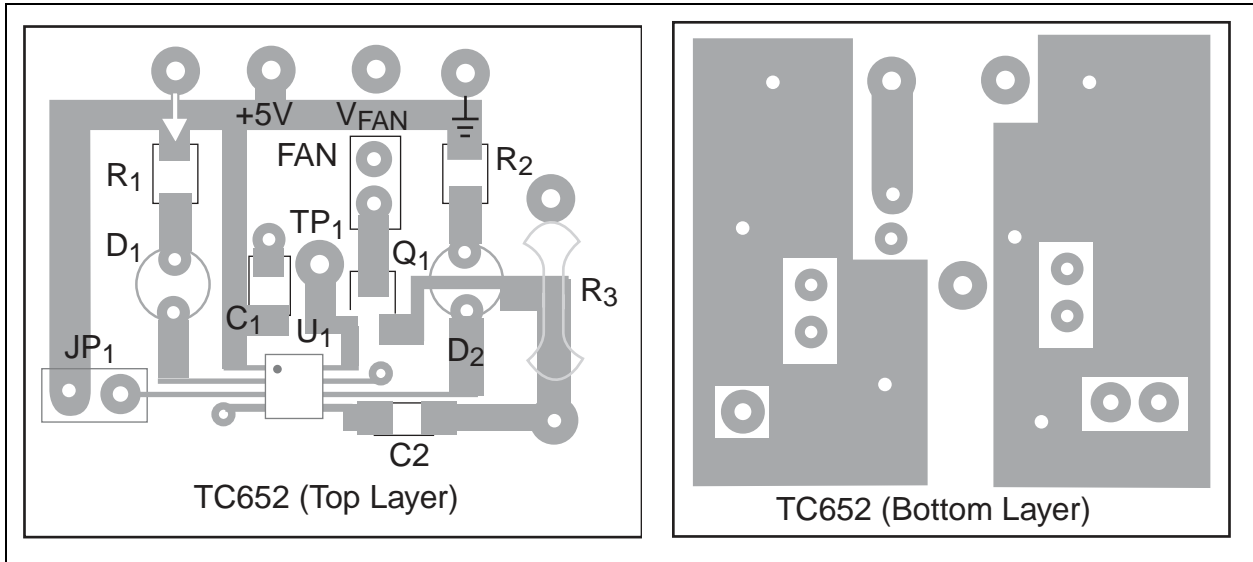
TC652 Demo Board, Top and Bottom Layer
